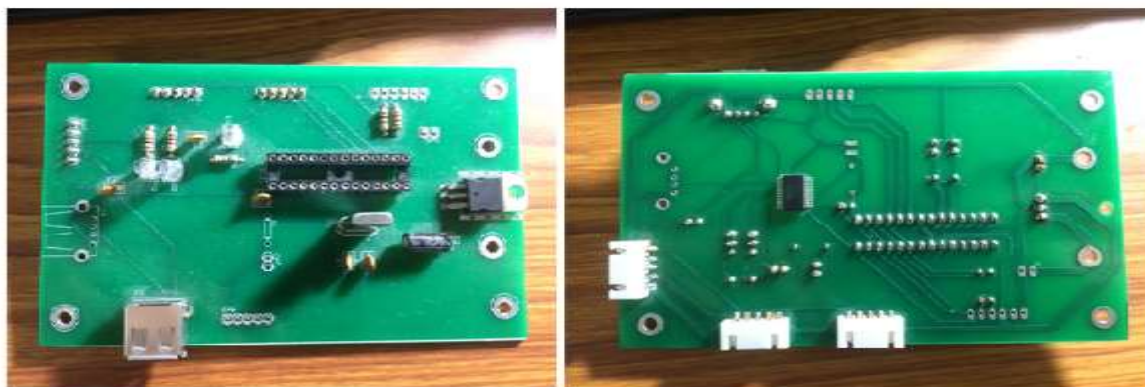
PCB Fabrication Top and Bottom Layers of the DE Design Post Fabrication
